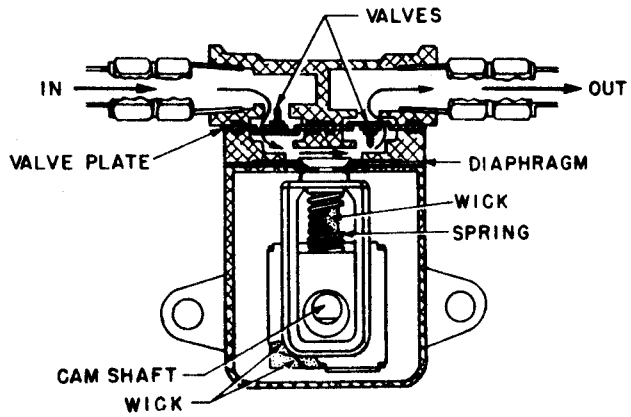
HEATER FUEL PUMP SECTIONAL VIEW
